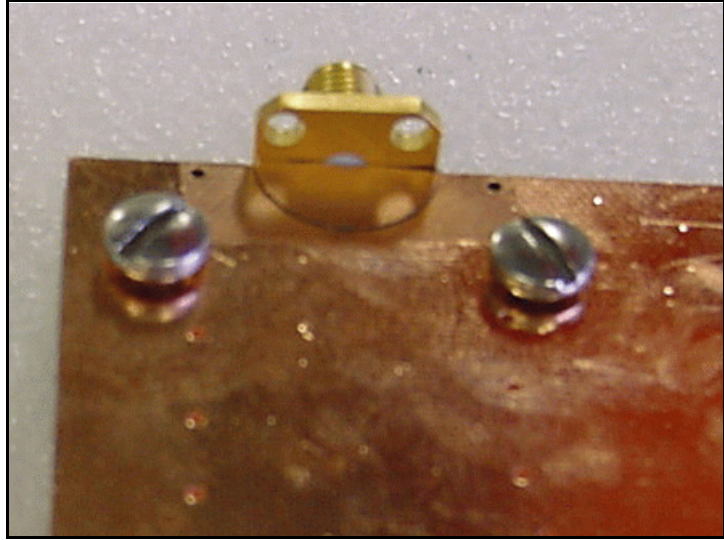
The connector has been soldered to the circuit card, the semicircular cutout has been placed into the semicircular void on the circuit card. This picture also shows the screws used to hold the bottom piece of hardware that hold the connector onto the circuit board.
